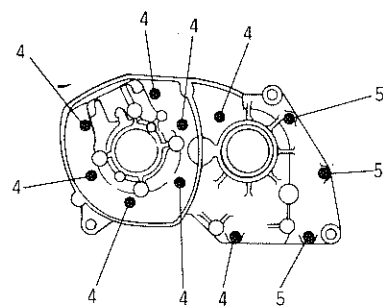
Installation pattern for crankcase screws. #5 holes are for 40mm screws - #4 holes are for 45mm screws.
